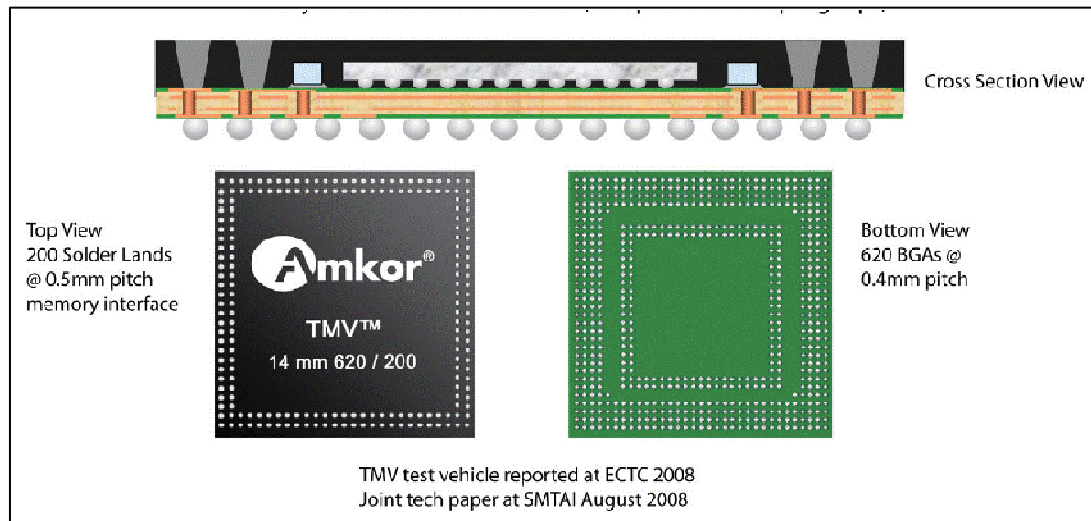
Cross-section top and bottom view of a new TMV™ PoP package [3].
